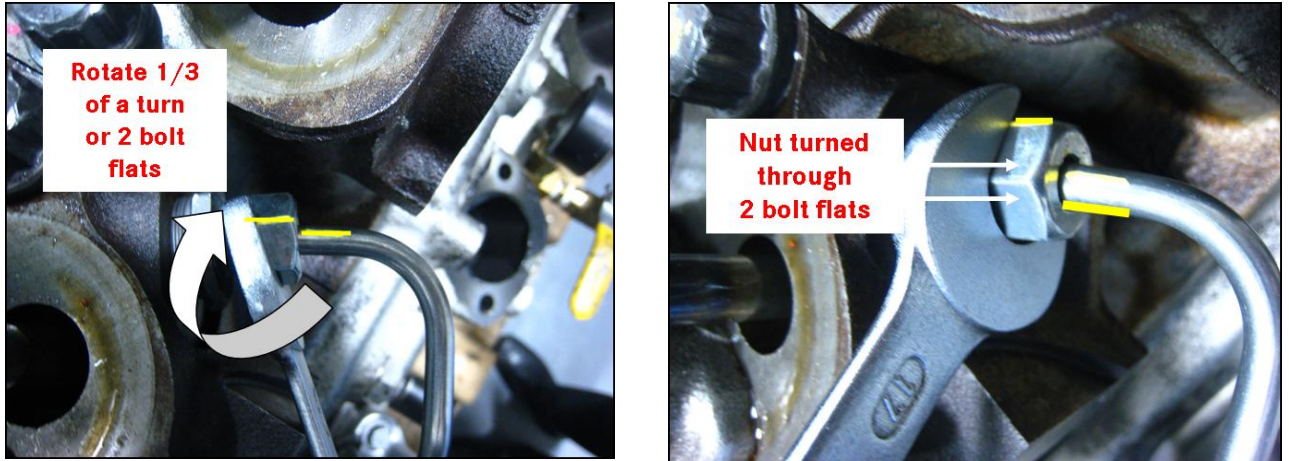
Marking Of High Pressure Fuel Injector Line And Nuts
